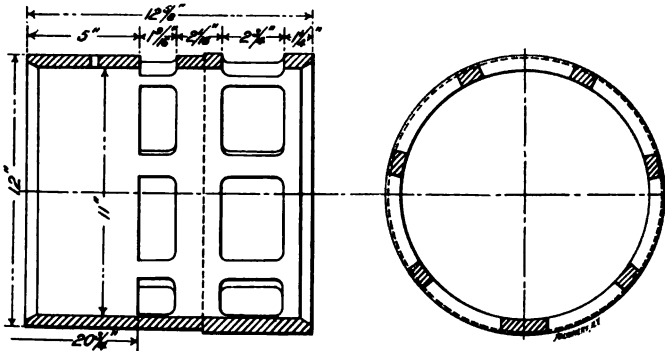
Valve Chest Bushing for Atlantic Type Locomotive.
